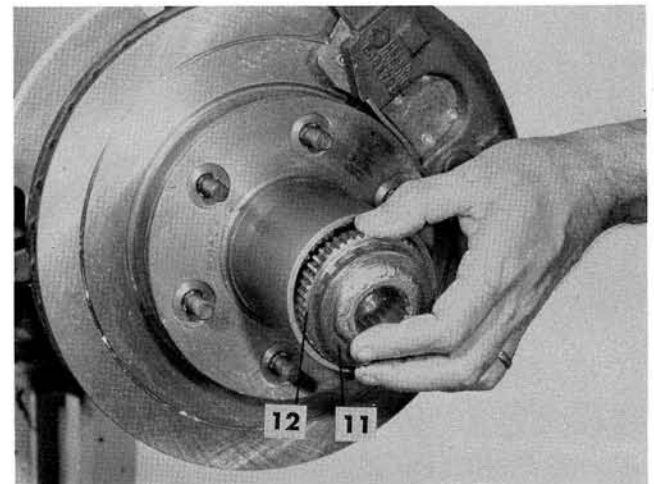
Assemble axle shaft snap ring (10). Push inward on gear, and if necessary, pull out axle shaft with bolt to allow clearance in groove for snap ring on the axle shaft. Be sure snap ring is fully seated in the snap ring groove of the shaft.
